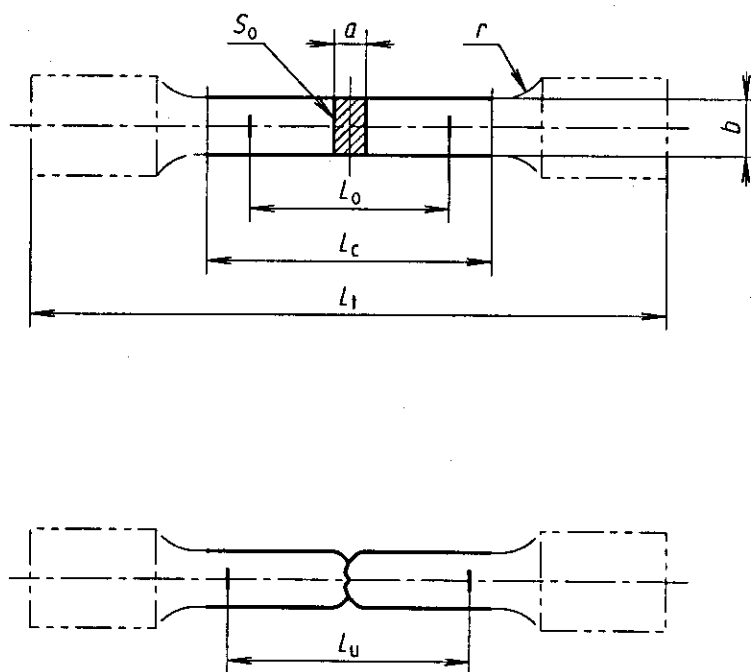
Machined test piece of rectangular cross-section before and after fracture
